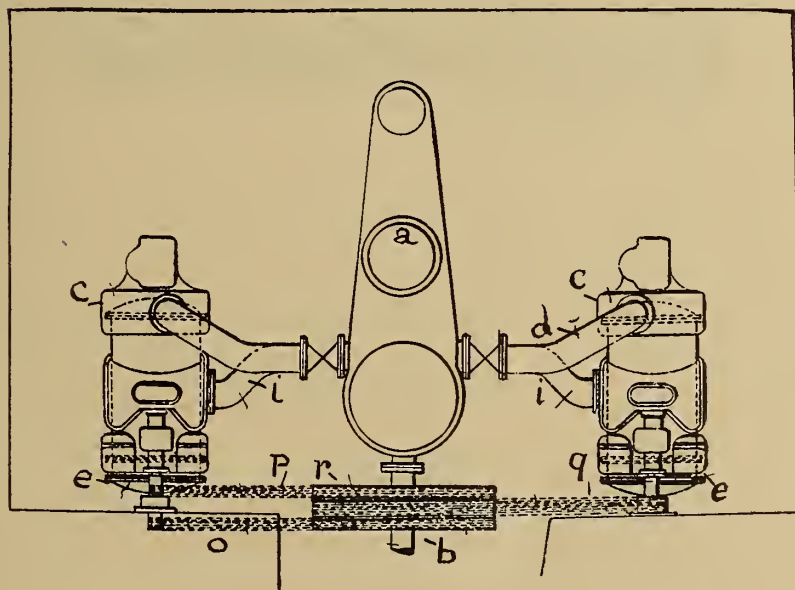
PLAN OF RECIPRO-TURBINE COMBINATION WITH SINGLE PROPELLER SHAFT
